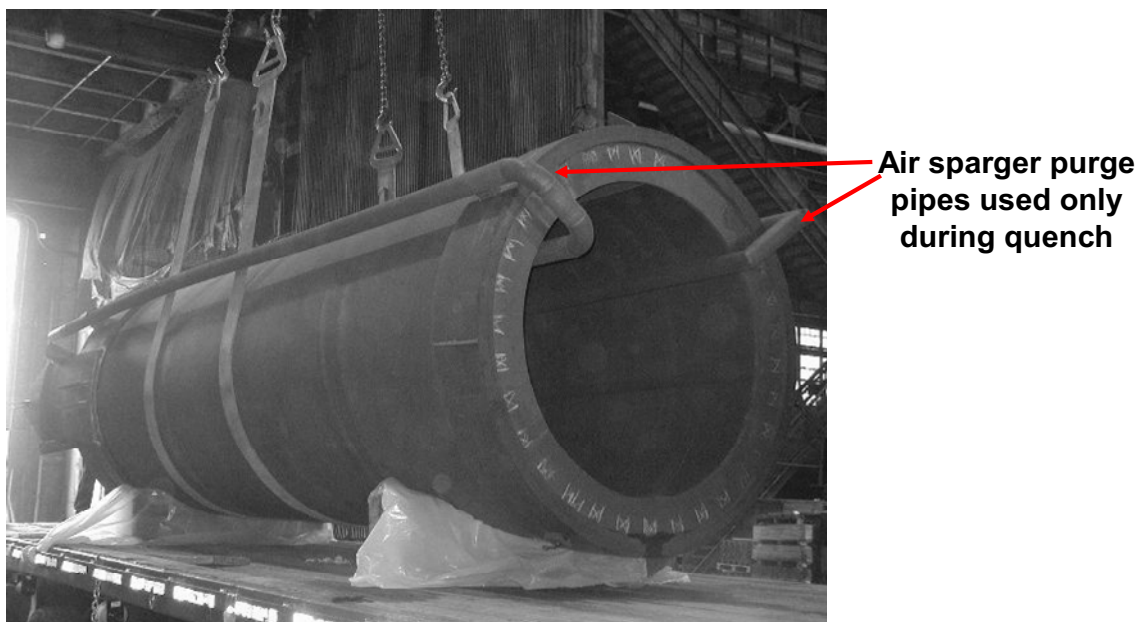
Postannealed View of the Prototype Waste Package Outer Corrosion Barrier
